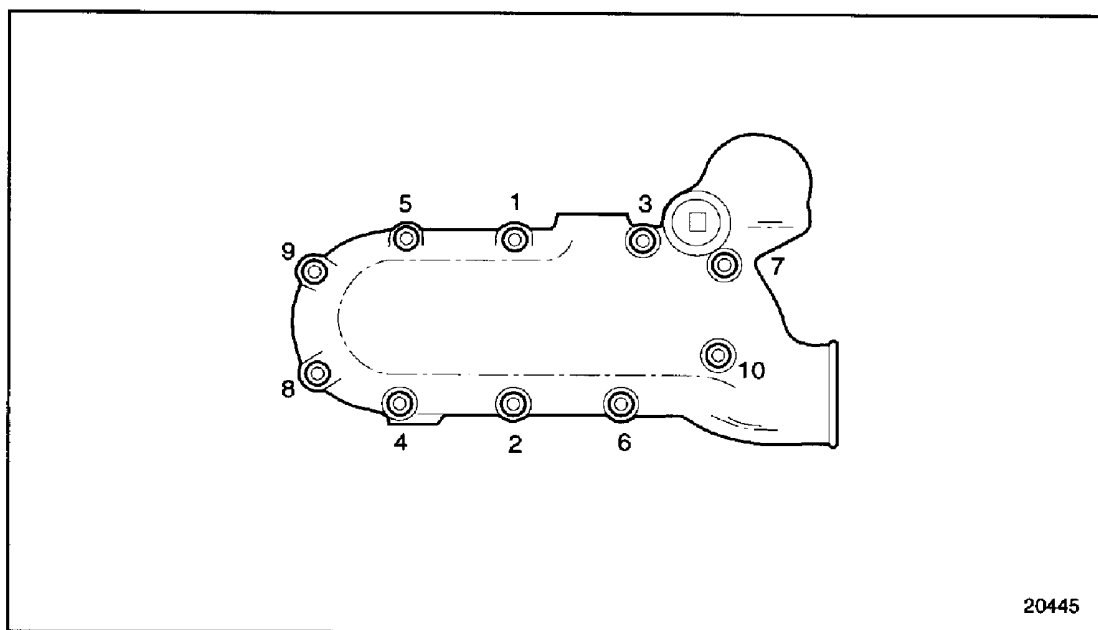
Oil Cooler Housing Bolt Torque Sequence
